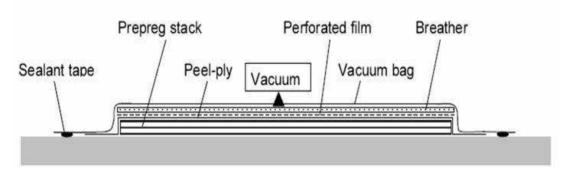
Cross-section of the contact moulding set-up, showing the stack of consumables used for vacuum bagging
